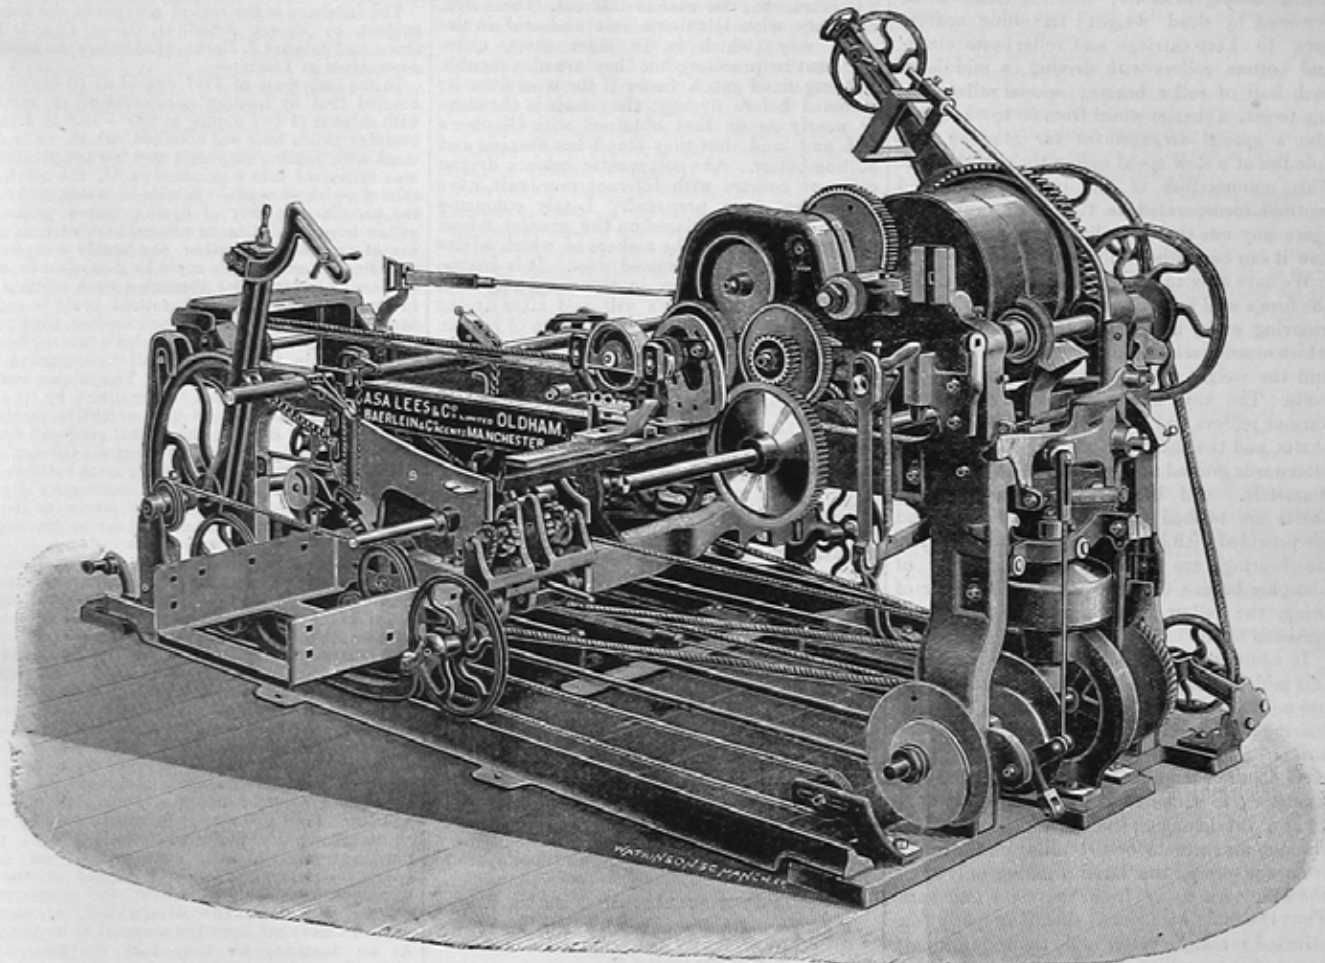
HEADSTOCK WITH RIM AT SIDE: SHewing THE ROLLER GEARING.—MESSRS. ASA LEES AND CO., LIMITED OLDHAM.
